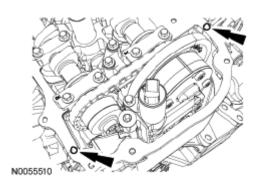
Applying RTV Silicone To Engine Front Cover-To-RH Cylinder Head Joints Courtesy of FORD MOTOR CO.
